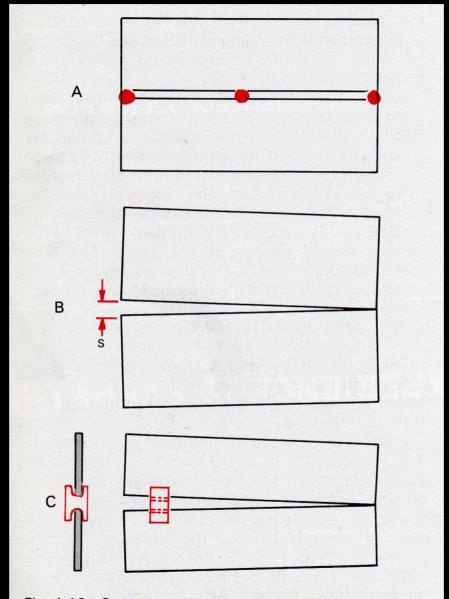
Some methods used to maintain correct position of welded pieces, since the weld metal shrinks as it solidifies and cools: A—"Tacking" pieces together before welding. B—Allowing for shrinkage (S). C—Use of special wedges.
